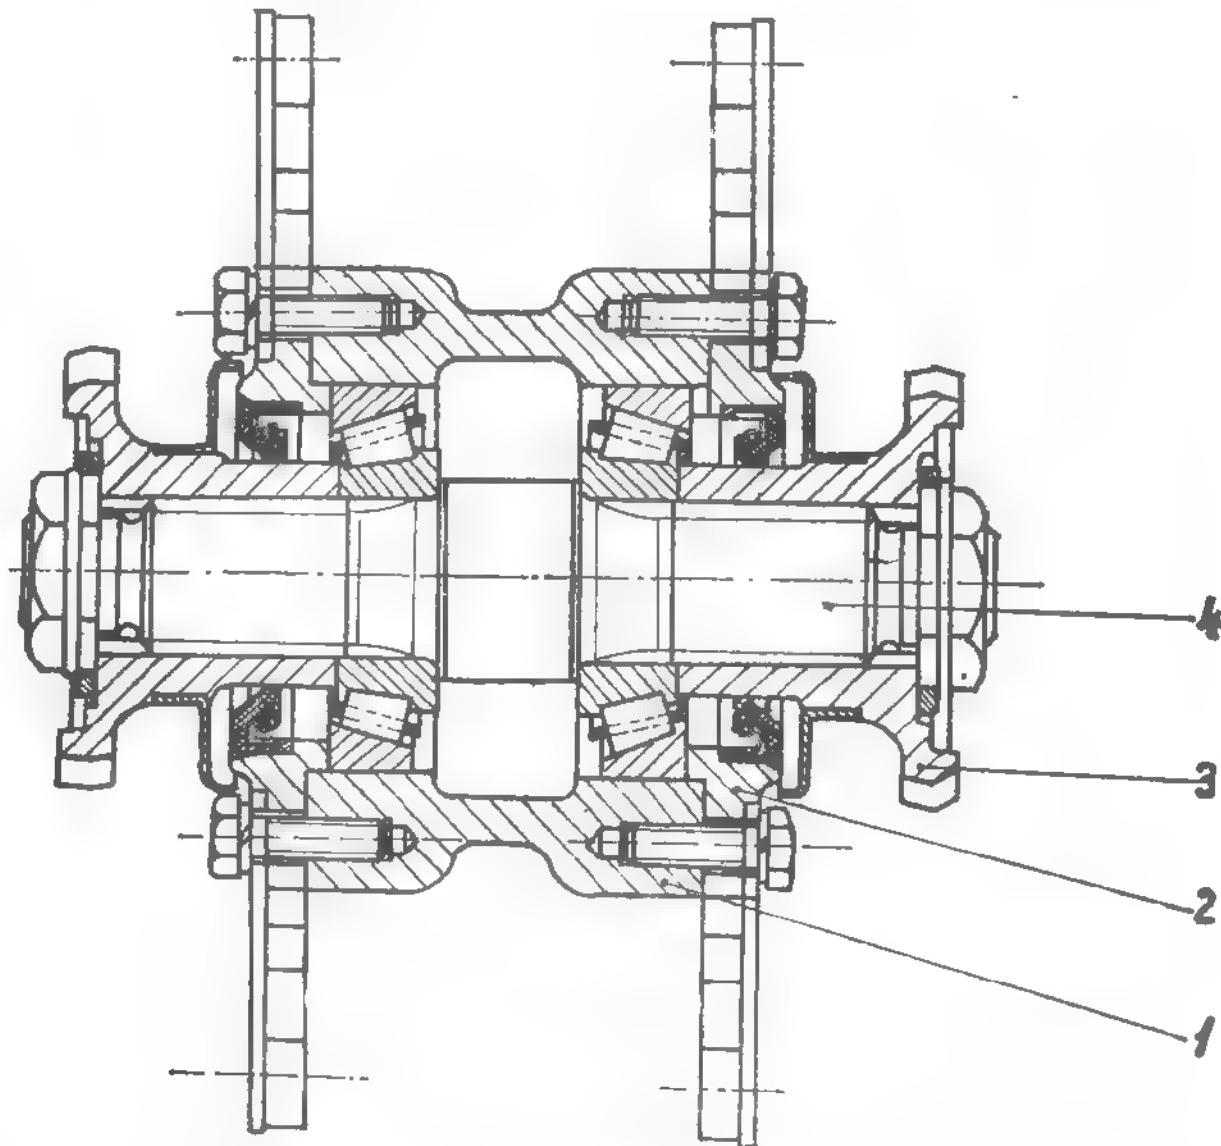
PROPELLER SHAFT INTERMEDIATE BRACKET
